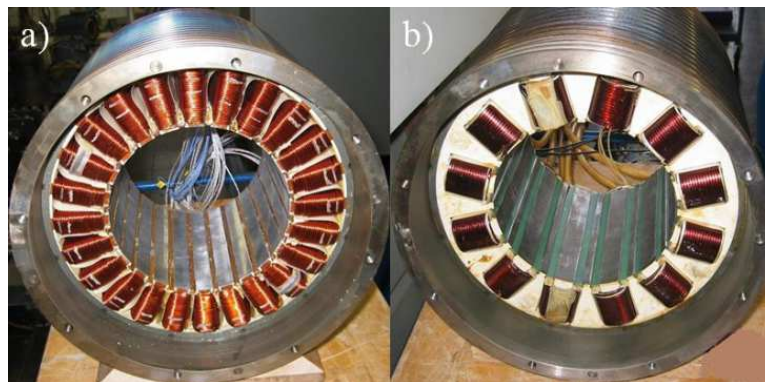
Stators of the tested machines, a) Machine 1, 2/3 short-pitched winding, b) Machine 2, full-pitched winding [7]
